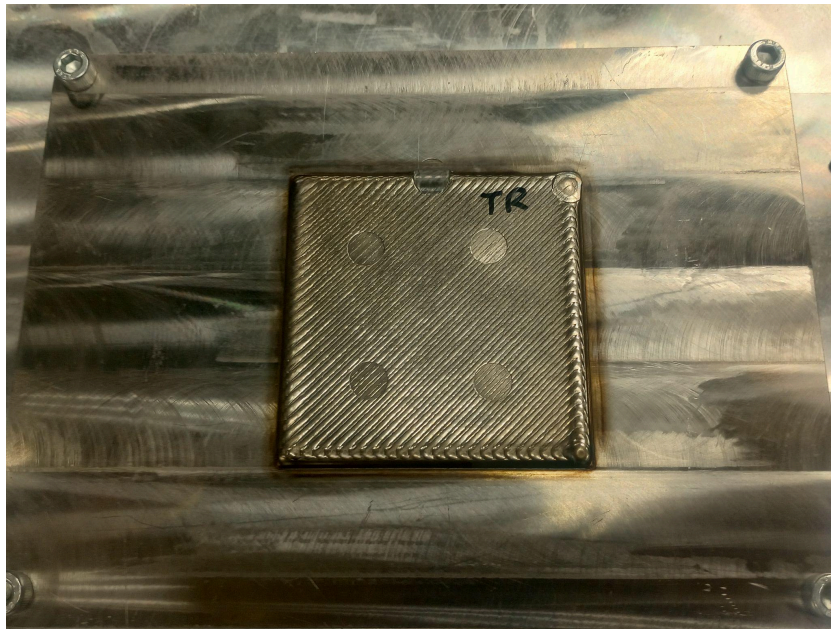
All forming marks on Full Size standoff design with TR marking Top Right of the piece
